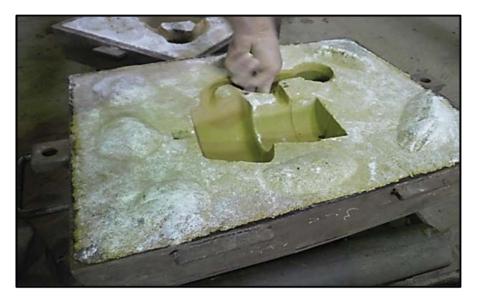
Preparing the Casting Channel in the Sand Mold. (Photo: the author)
